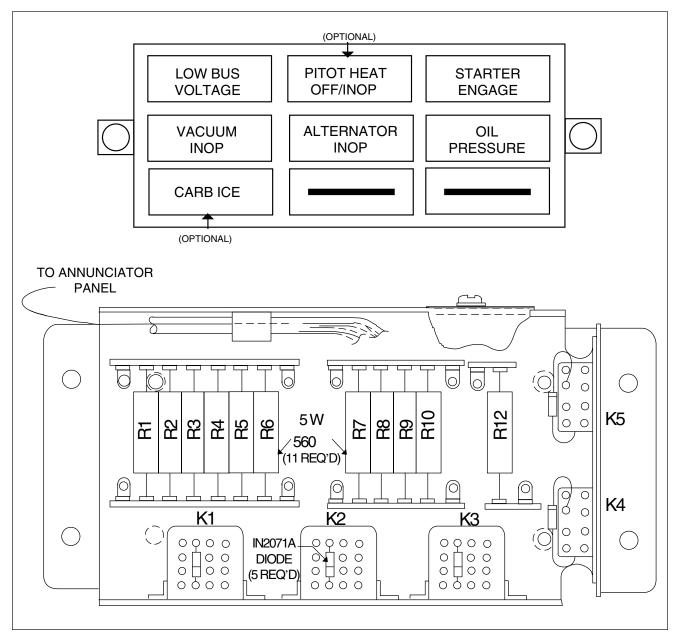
Annunciator Panel and Box Assembly (Warrior III)
